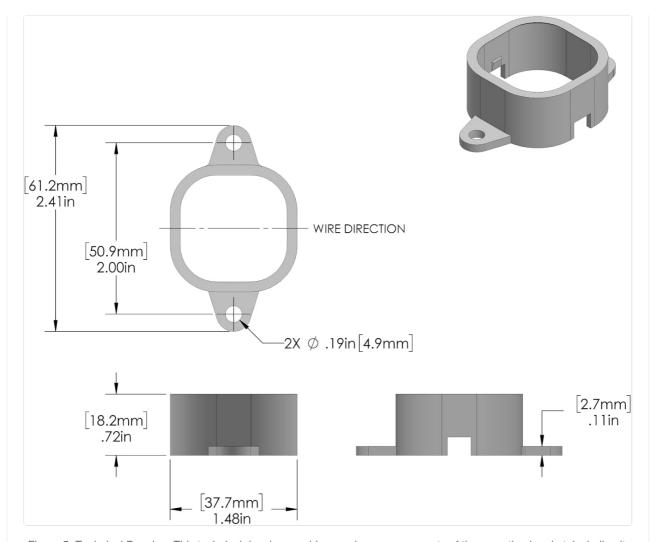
Technical Drawing. This technical drawing provides precise measurements of the mounting bracket, including its overall dimensions and the diameter of the screw holes, crucial for proper installation planning.
